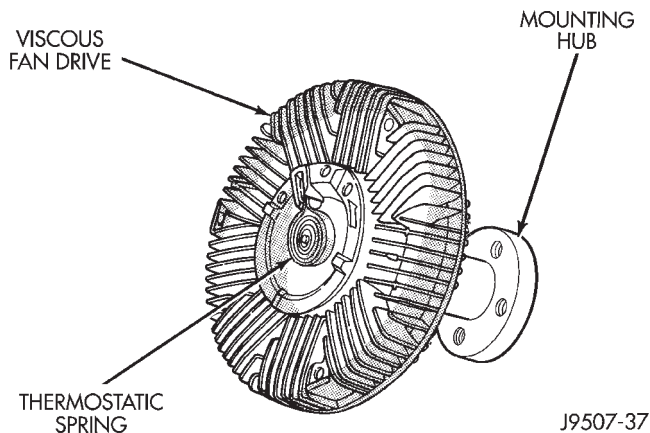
Viscous Fan Drive—4.0L Engine—Typical
